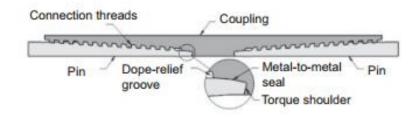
Cross-sectional view of a typical premium connection (K. Hamilton 2009)
